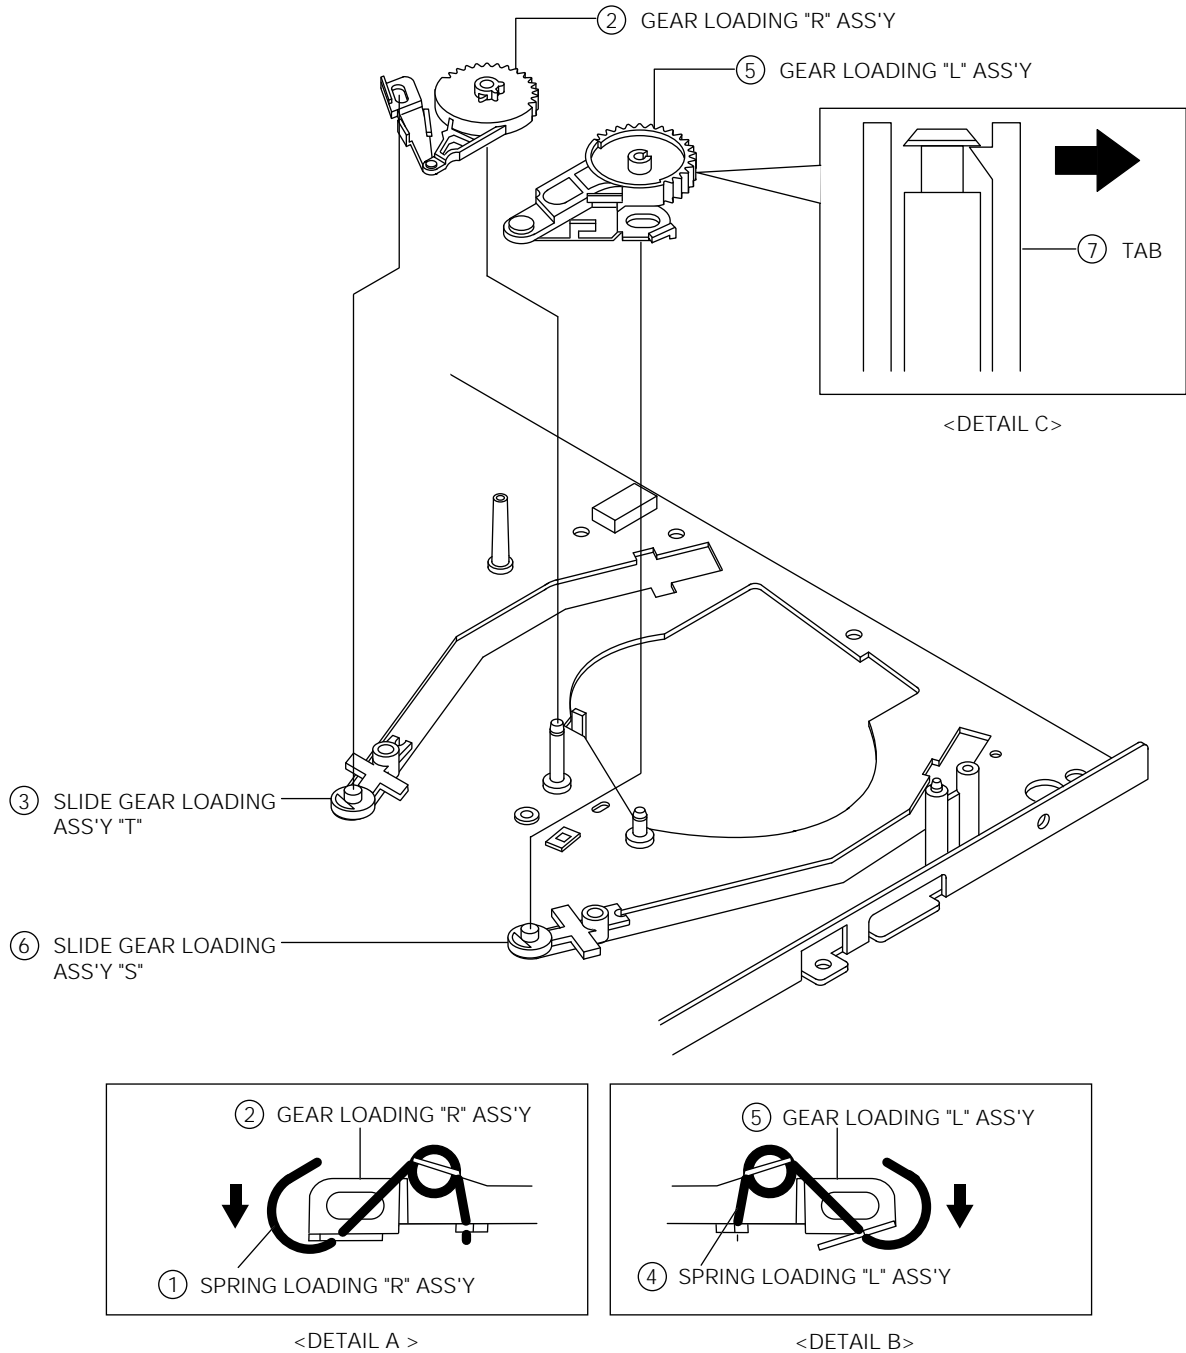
Gear Loading "L", "R" Ass'y Removal
